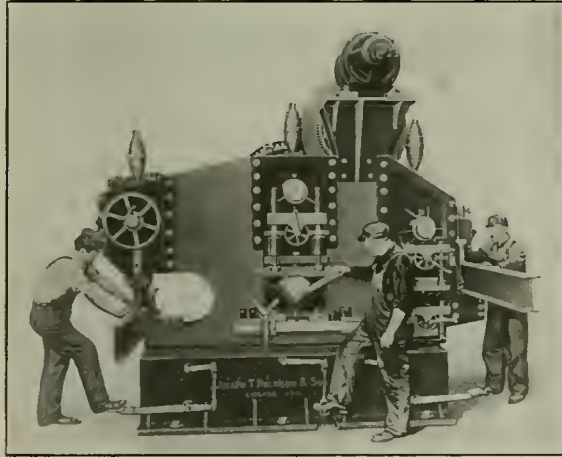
Ryerson Quintuple Punching and Shearing Machine.
